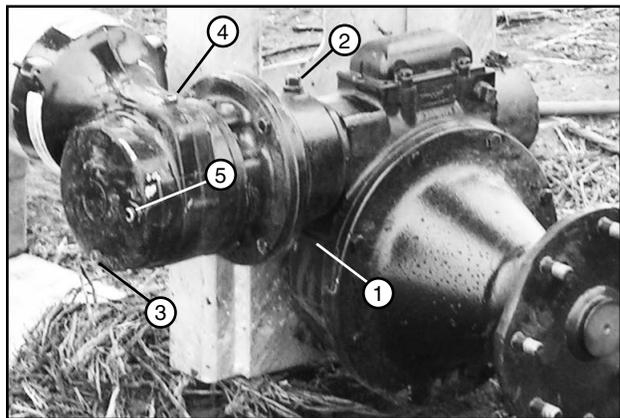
1. Drain Plug Bell Housing 4. Fill Plug Gear Motor
